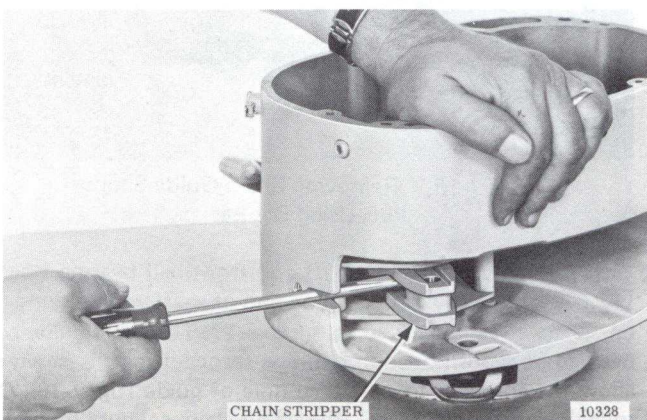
Chain Stripper Being Partly Removed From Chain Guide (Roller Chain Model)
